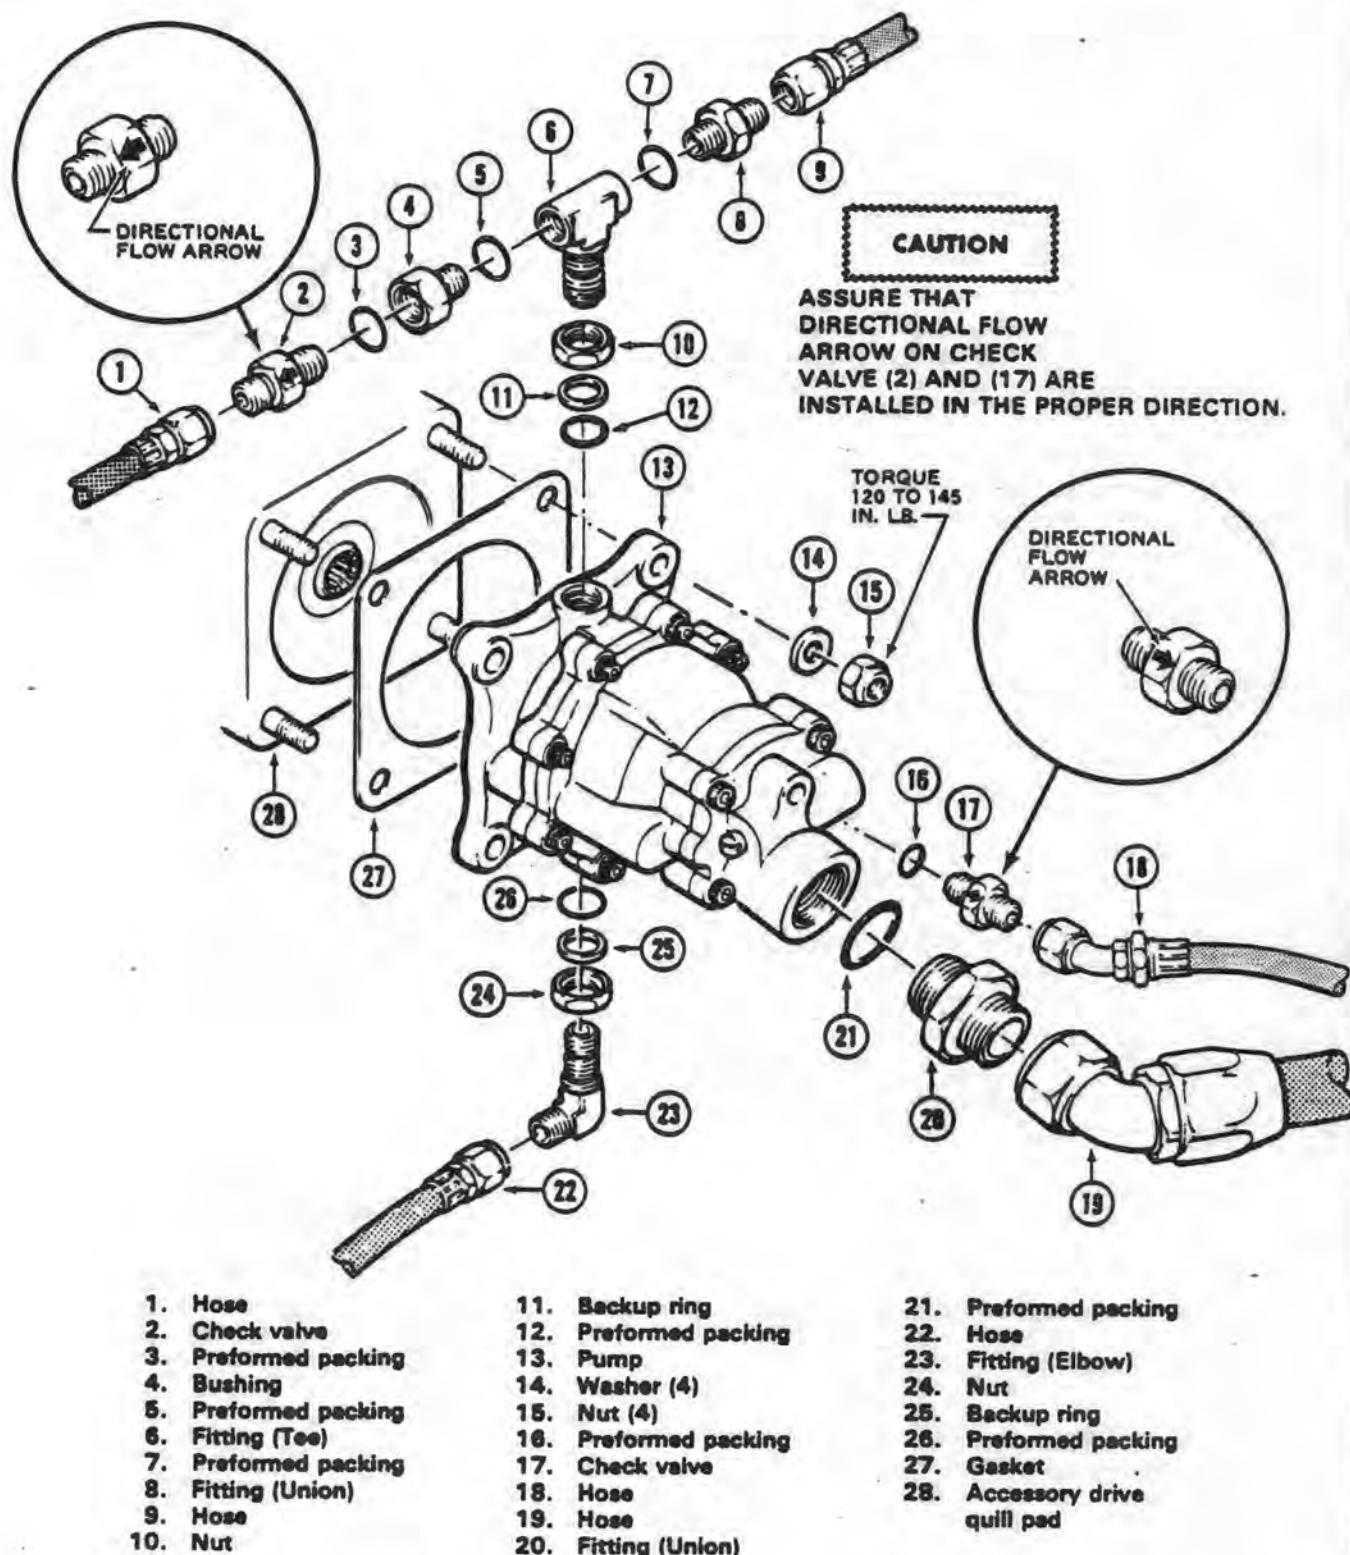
Hydraulic pump assembly (system No. 2) —
